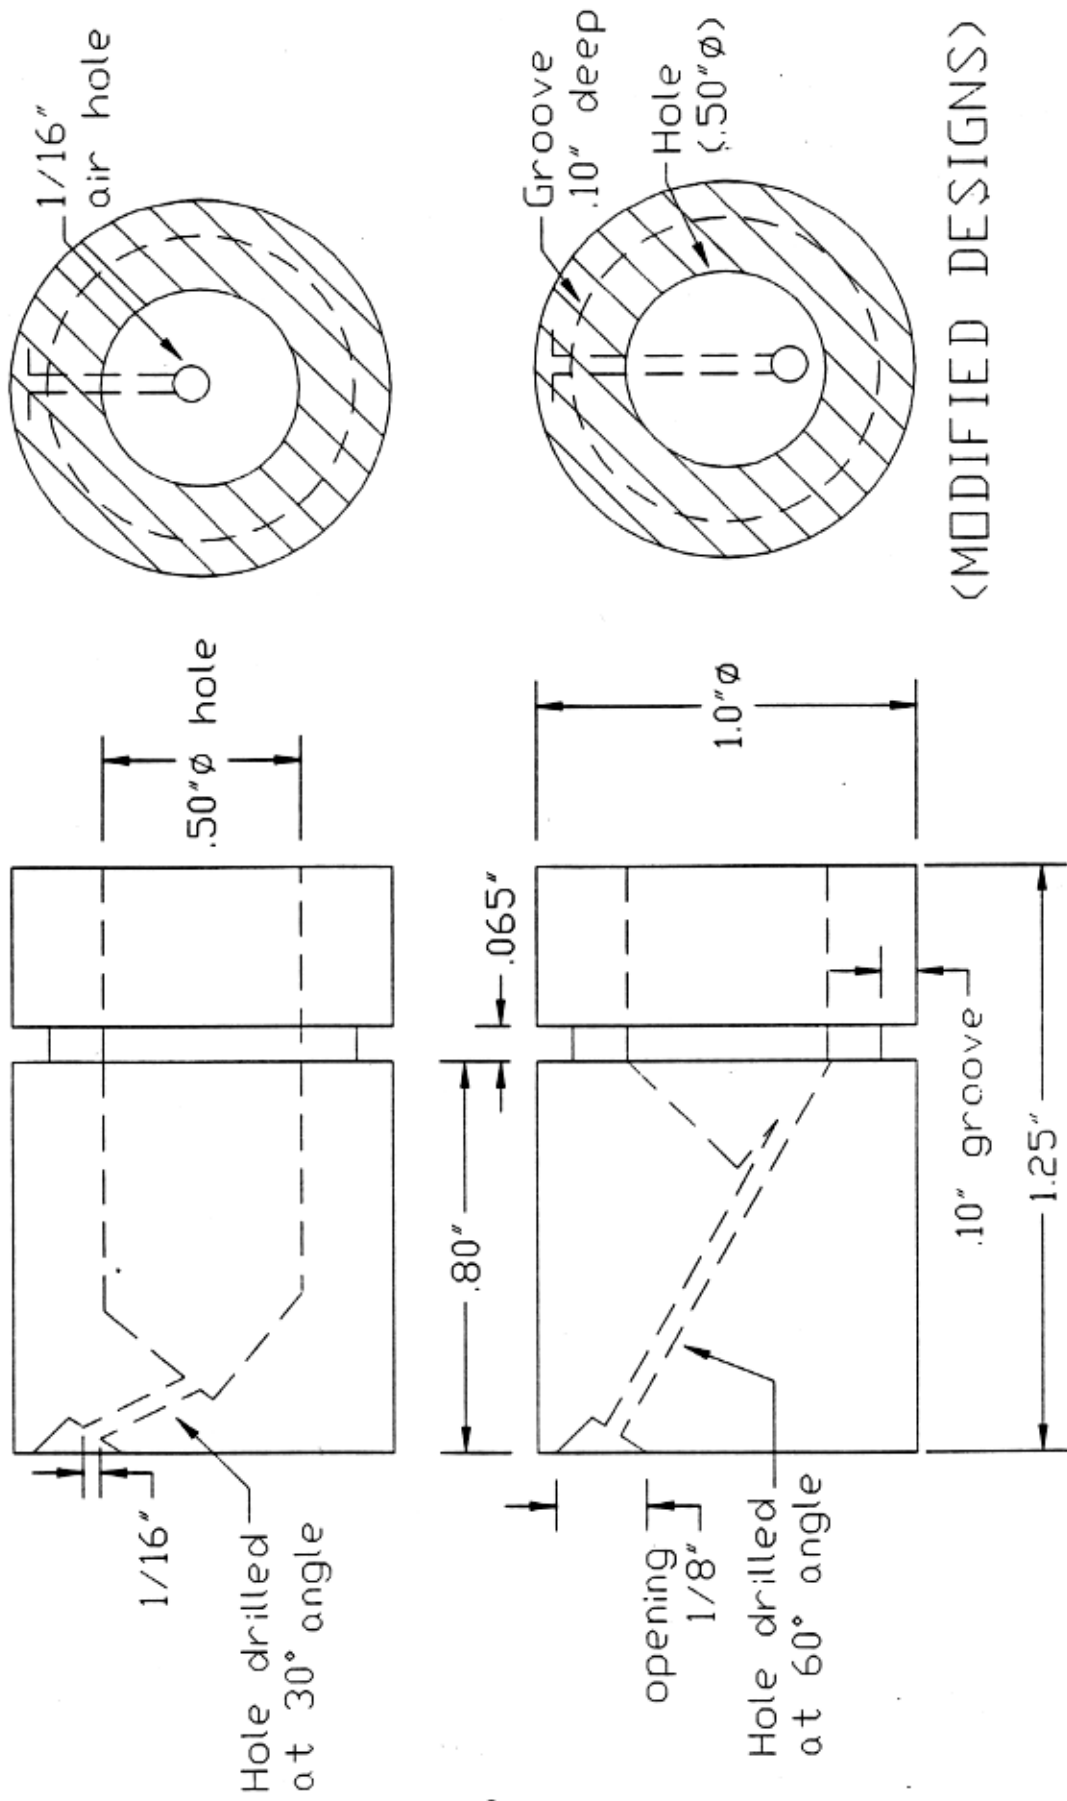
Schematic Diagram of Air Injection Nozzles (Type B)
